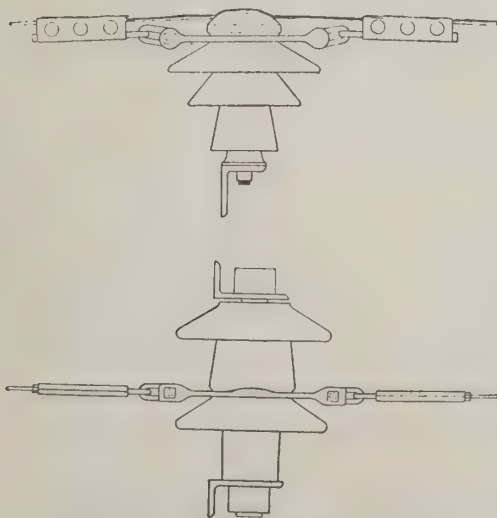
Insulator Clamping Devices designed by R. D. Combs and Co., New York City.
